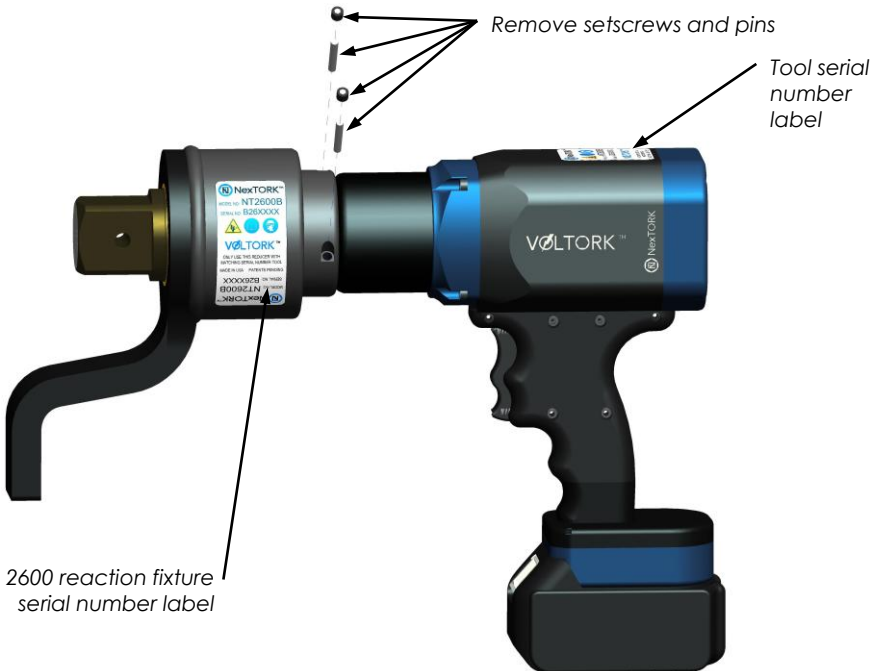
2600 REDUCER REMOVAL/INSTALLATION
